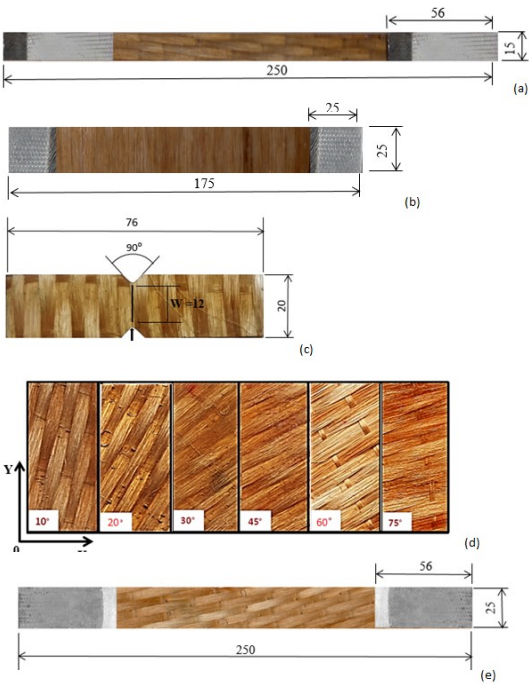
Test specimen at 0° (a); Test specimen at 90°(b); Test specimen dimensions (mm) for the iosipescu test at 90° (c); Test specimens with the fiber angle used in the two laminas (d); Off-axis test specimen.(e).
